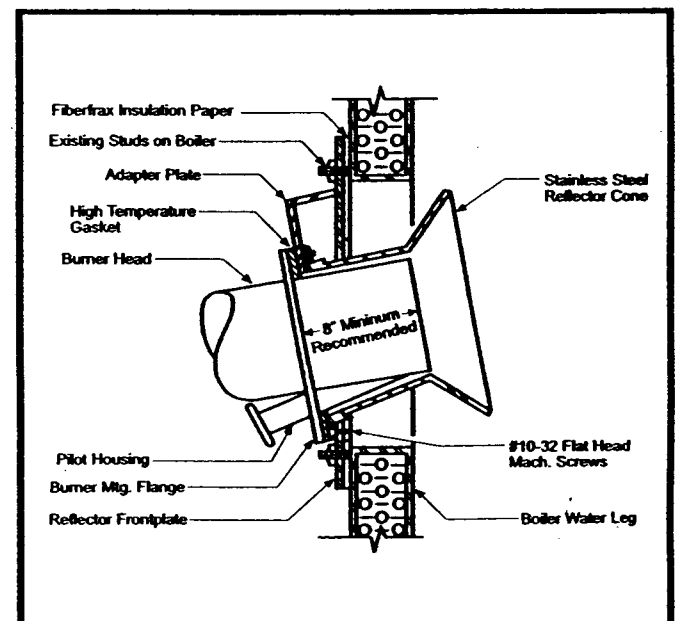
Top View Reflector Frontplate through Right Hand Firing Door
